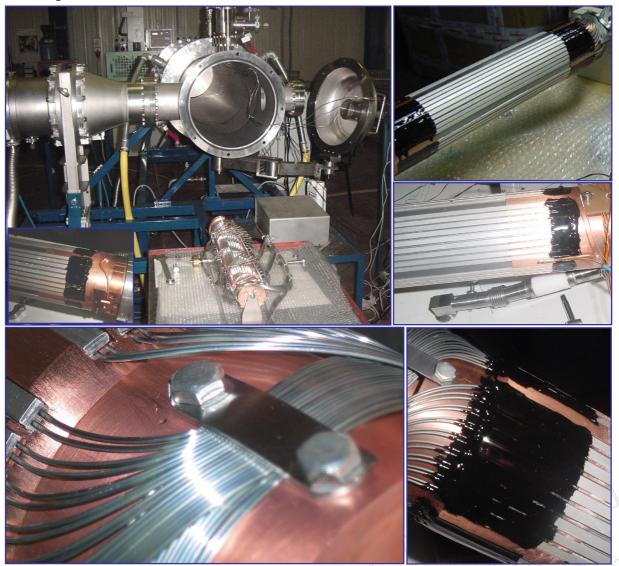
Vacuum soldering: CECOM oven and soldered parts
